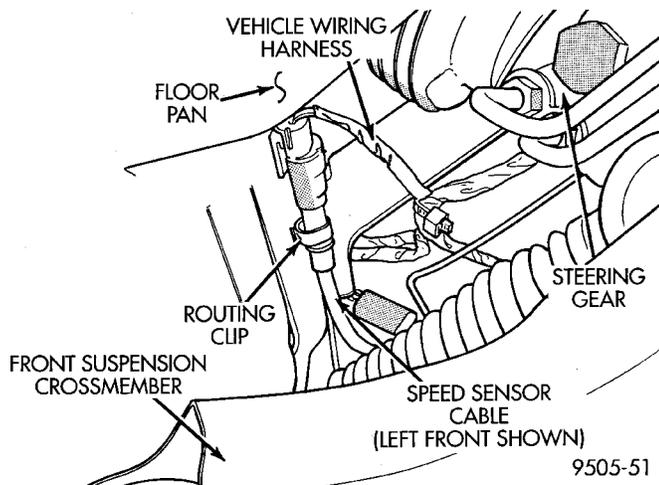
Speed Sensor Cable To Wiring Harness Connection
